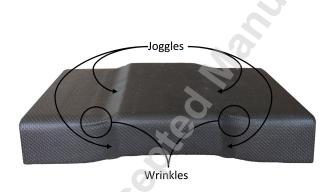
Manufactured FRP component: 'C' cross-section profile with joggles.
